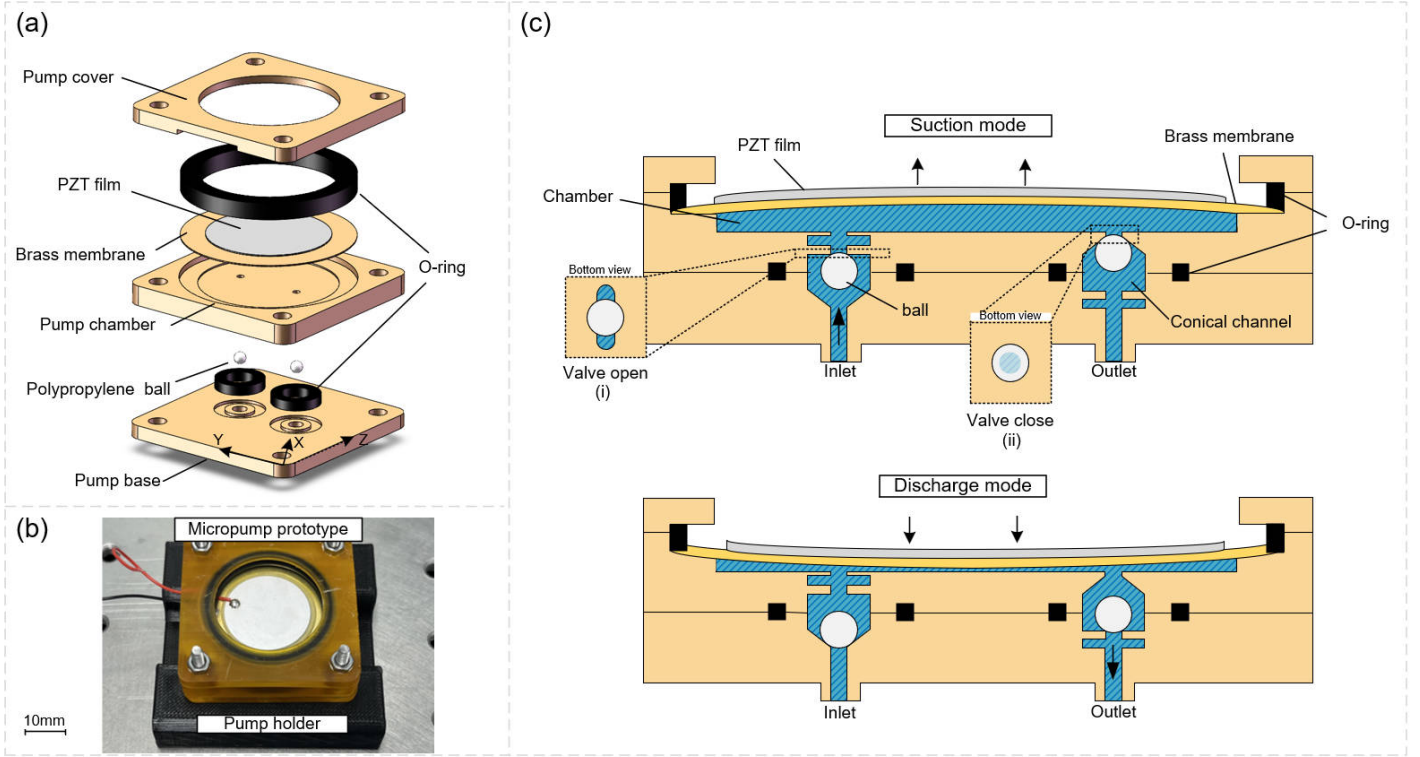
(a) Exploded view of the micropump structure, (b) Picture of the assembled 3D-printed micropump, (c) The working principle of a micropump with ball valves
